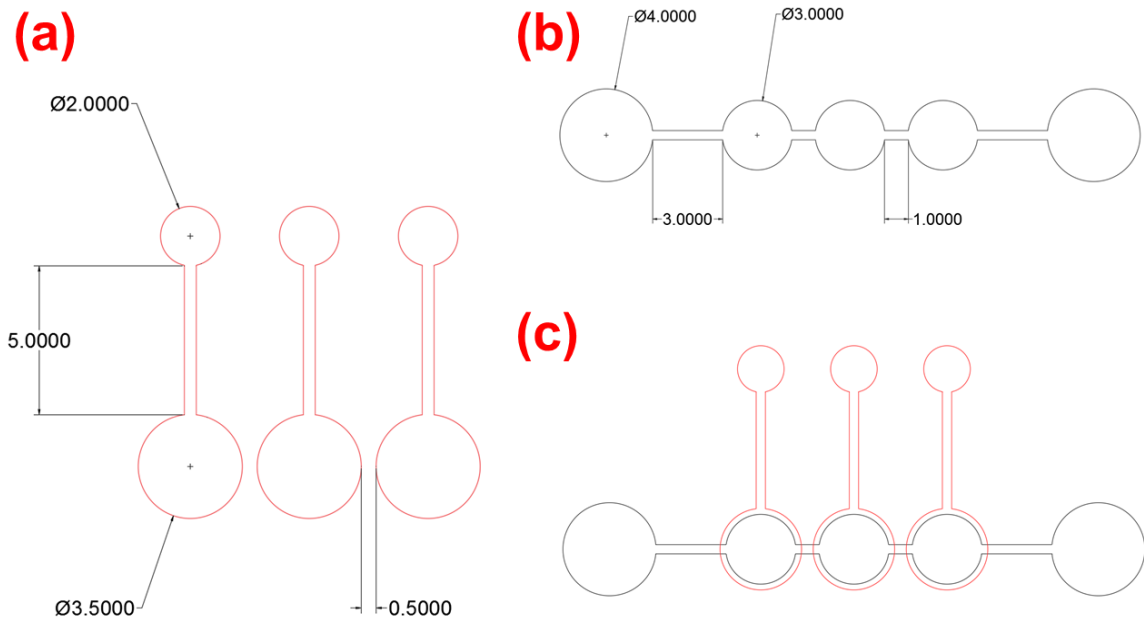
Design of a 3-valve normally open pneumatic pump. (a) Pneumatic layer design and dimensions. (b) Fluidic layer design and dimensions. (c) Layers aligned. All dimensions are in mm.
